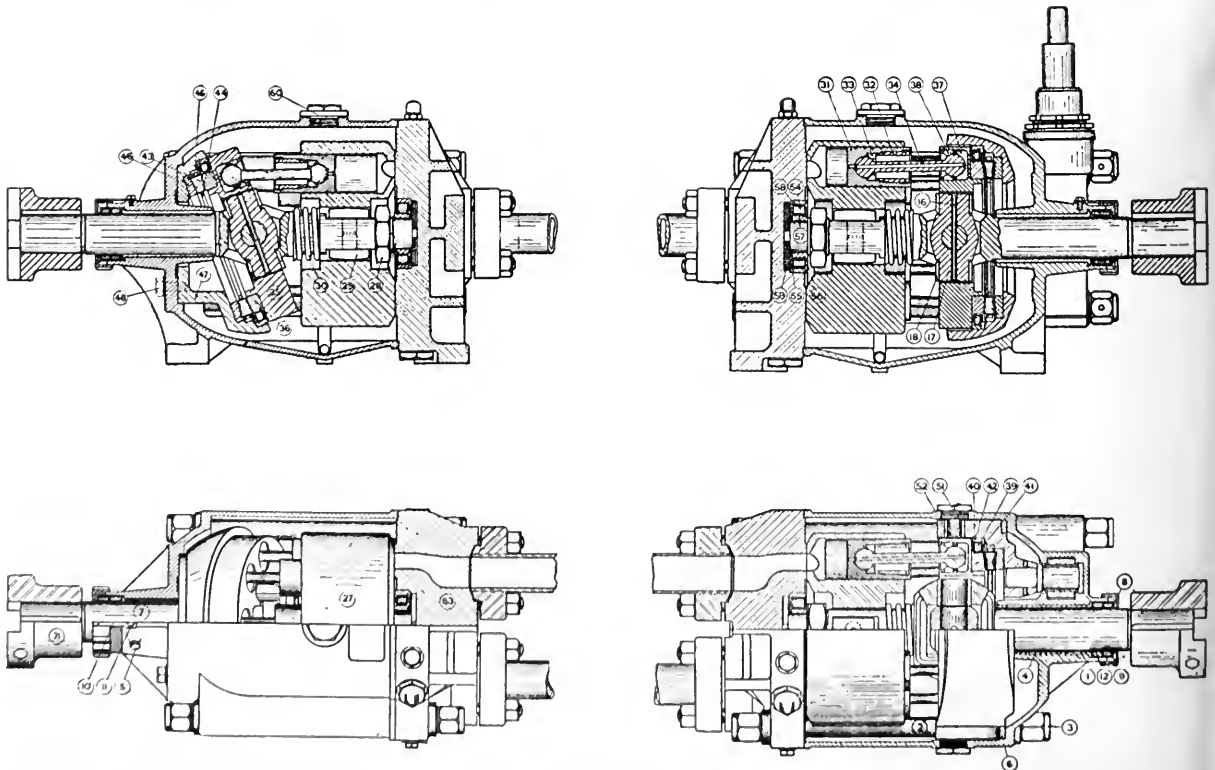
PUMP UNIT (RIGHT) AND MOTOR UNIT (LEFT) OF THE WATERBURY HYDRAULIC VARIABLE-SPEED GEAR ON GASOLINE SWITCHING LOCOMOTIVE OF UNIVERSAL ENGINEERING CORPORATION
